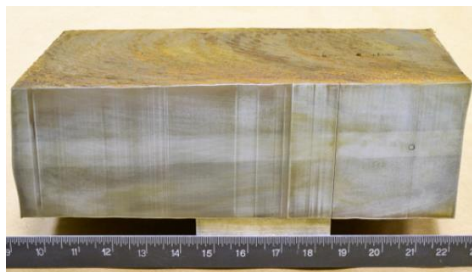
WF-70 Beltline weld revealed after removing the cladding and etching block CF [27].
